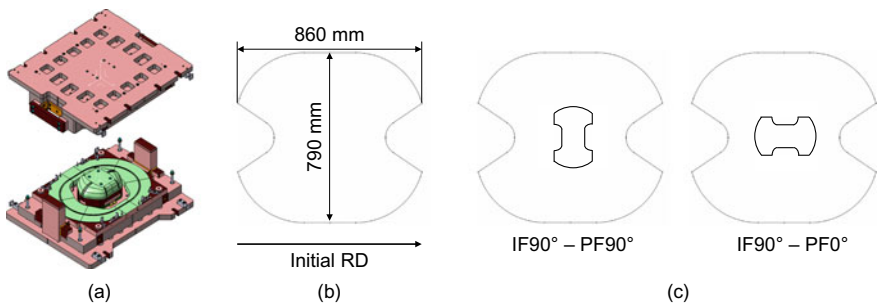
a Modified Marciniak tool, b specimen for the pre-forming process, c cutting process with for the two investigated load cases
